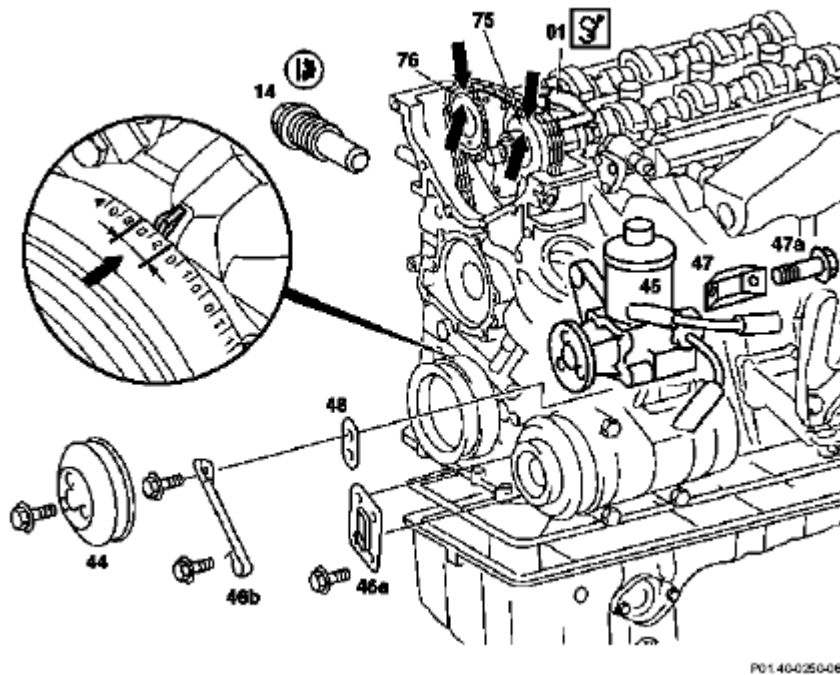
Identifying Timing Case Cover Remove/Install Components (2 Of 4)
